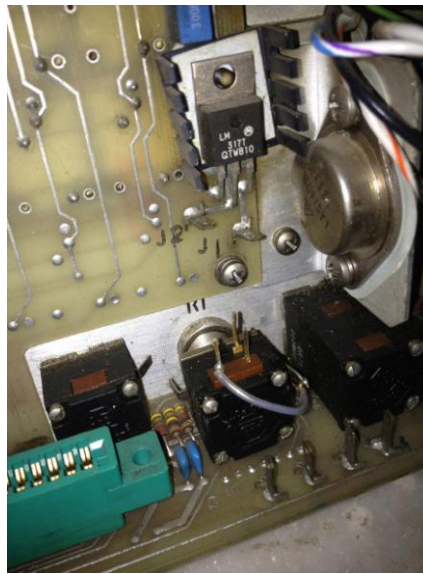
Locating the plugs A2J1, A2J2, A1J5, A1J6, A1J7 and A1J8 on the MFP Front Panel Assembly (all connections temporarily removed).
